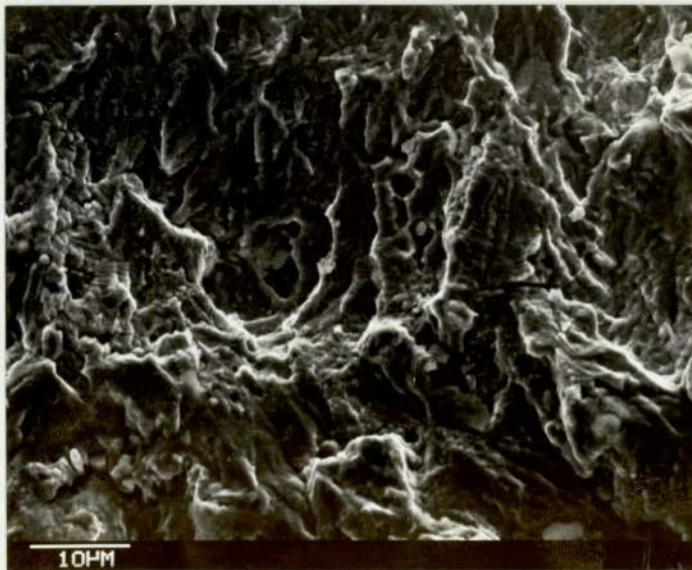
Fatigue fracture of core in nitrocarburised 080M15
